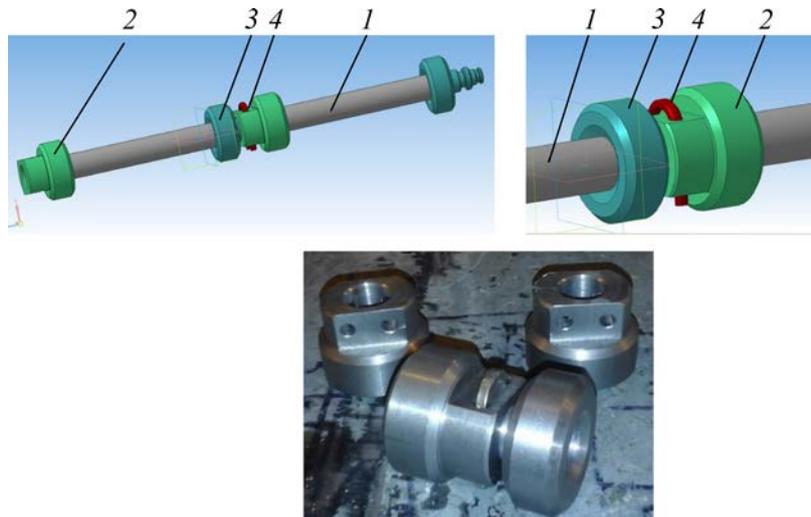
High-head pipe width quick-release coupling: 1—pipe; 2—sleeve; 3—nipple; 4—clip.
